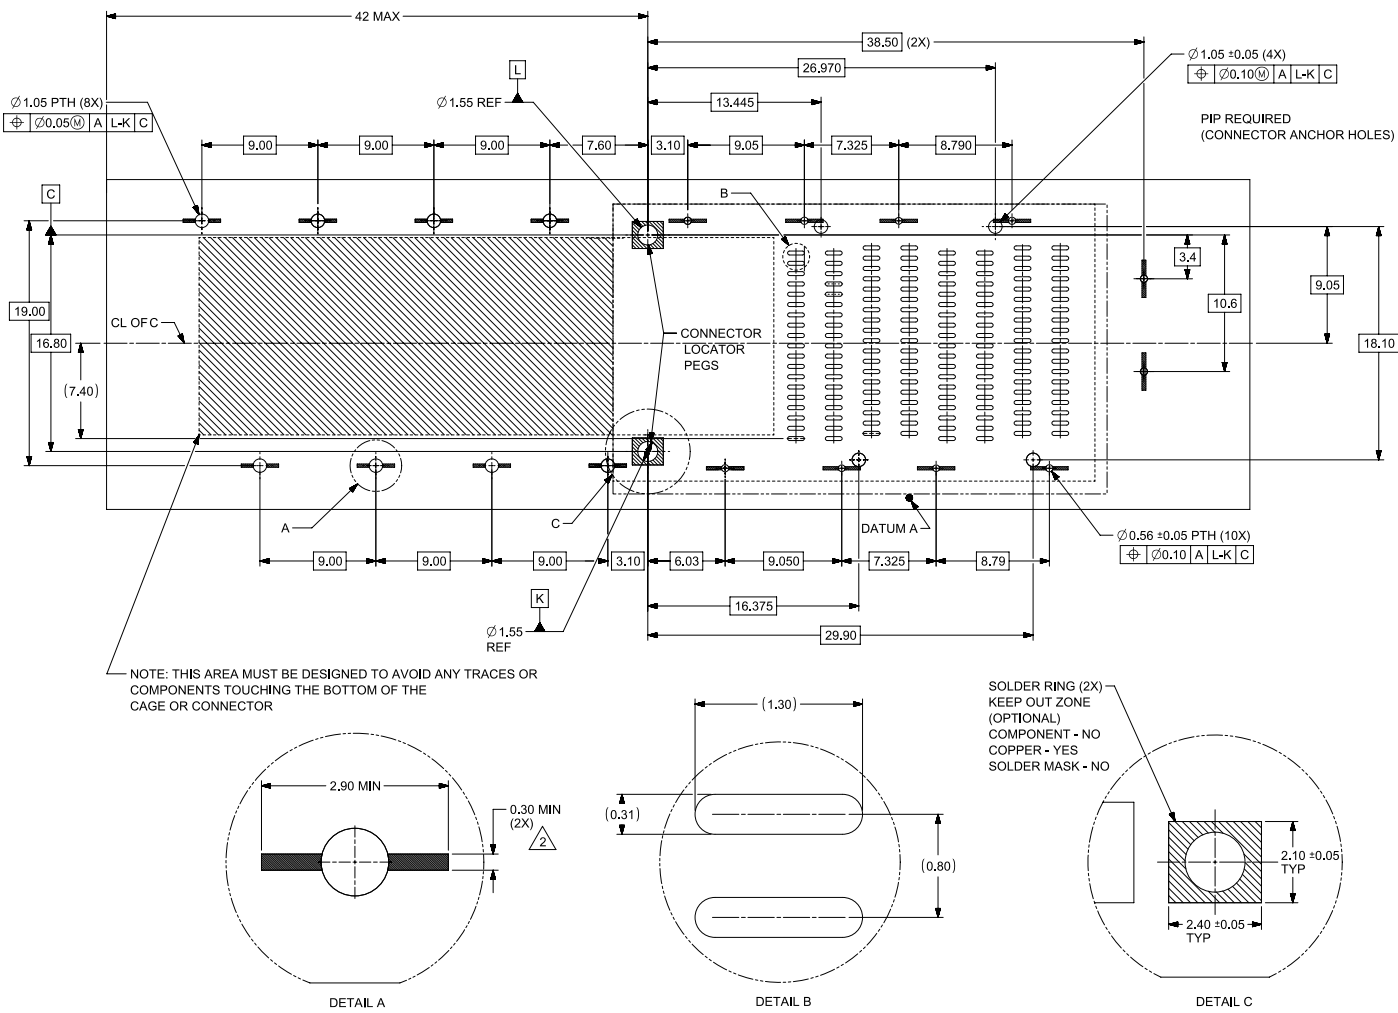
2x1 SMT Connector and Cage PCB Layout Implementation 2
